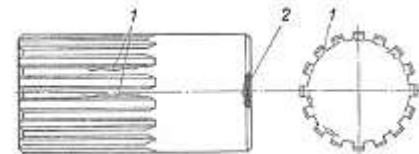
Cylindrical specimen with splines: 1, quench cracks in splines; 2, cracked edge of specimen [6, 16].
